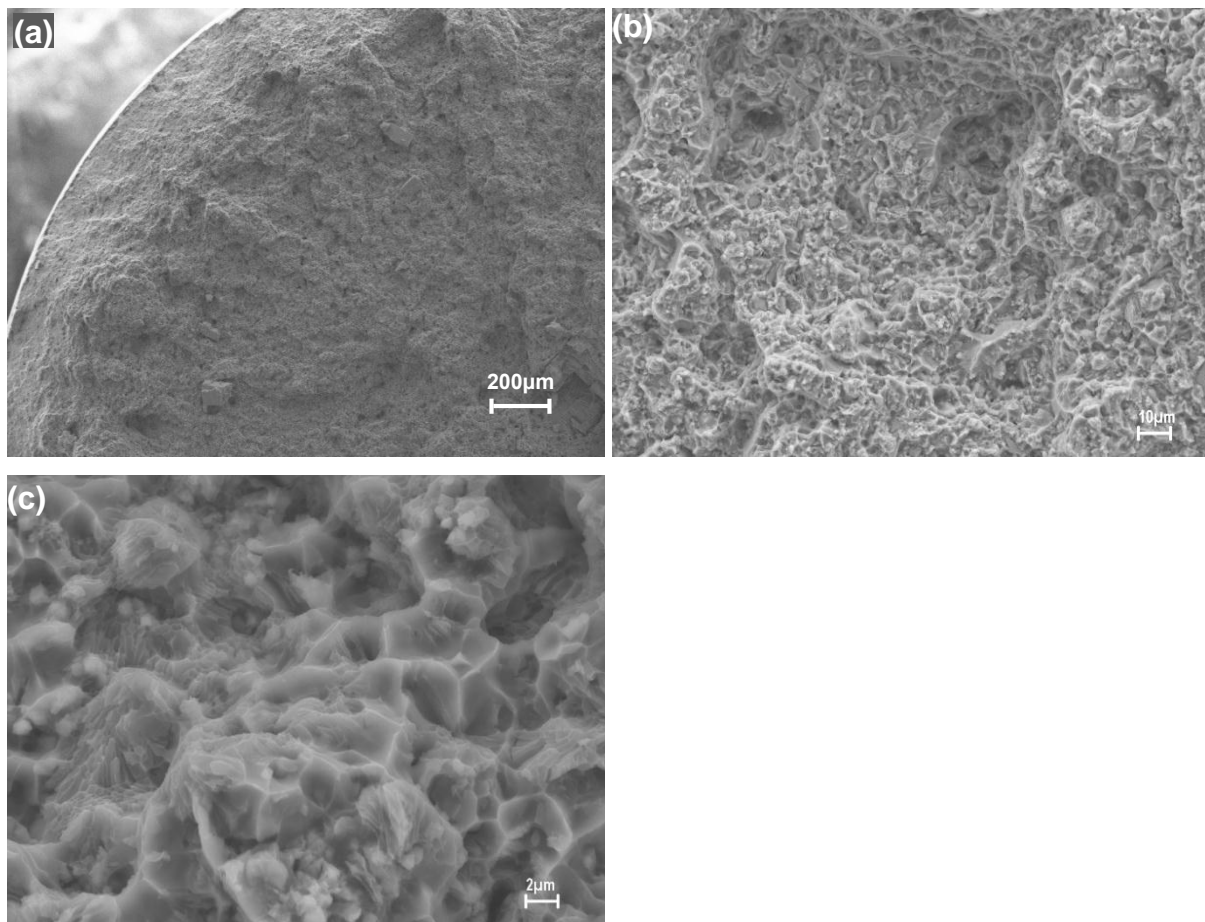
Typical fractographs on a cross section of $\phi 6.35$ mm die-cast tensile sample (a) overall fractal image, (b) fracture surface at high magnification, and (c) detailed fracture.
